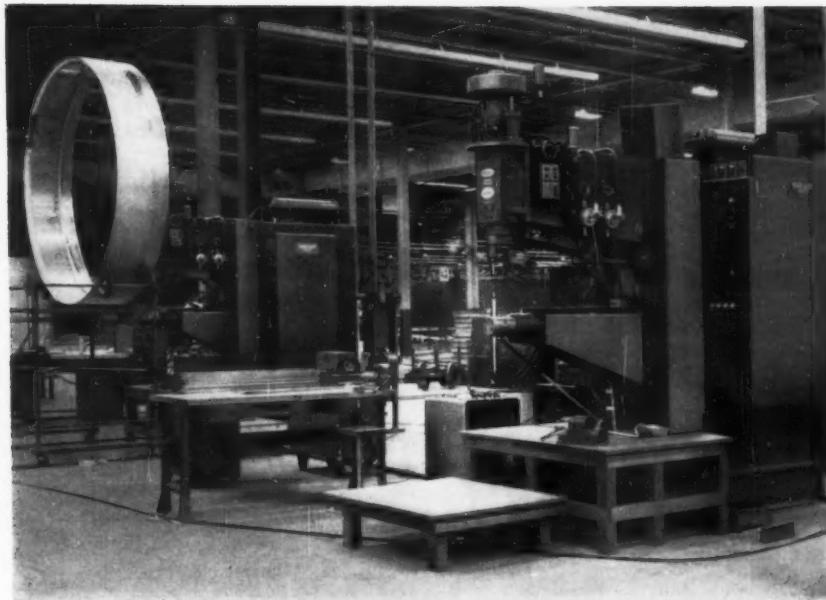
Z-shaped reinforcement rings are spot-welded to the barrels in this setup. The welds are $5/8$ inch in diameter and spaced 1 inch apart.
